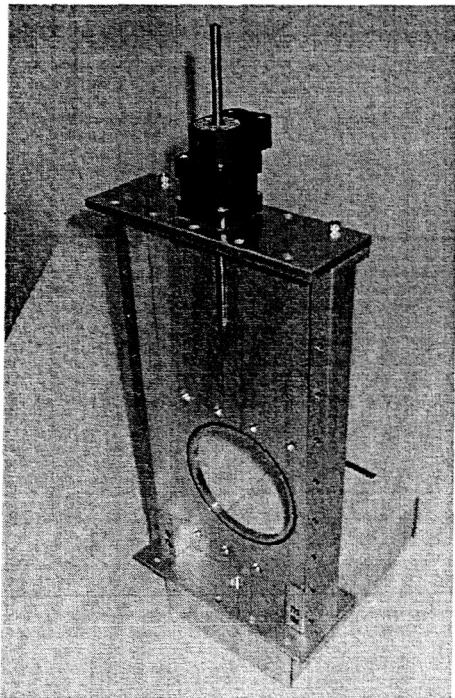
The Processing Chamber Evacuation Valve Housing and Actuator
